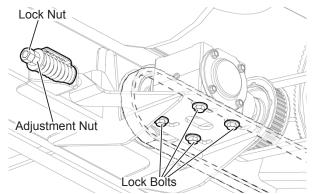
Left Draper Drive Belt 2 Tension Adjustment
